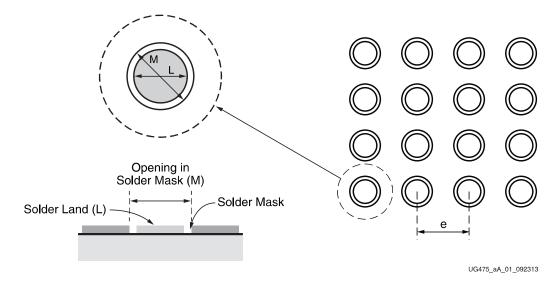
Suggested Board Layout of Soldered Pads for BGA Packages
